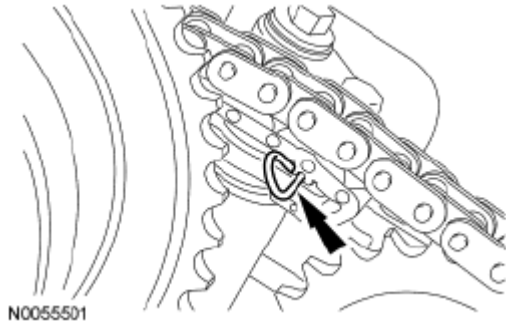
Locating LH Secondary Timing Chain Tensioner Lockpin
